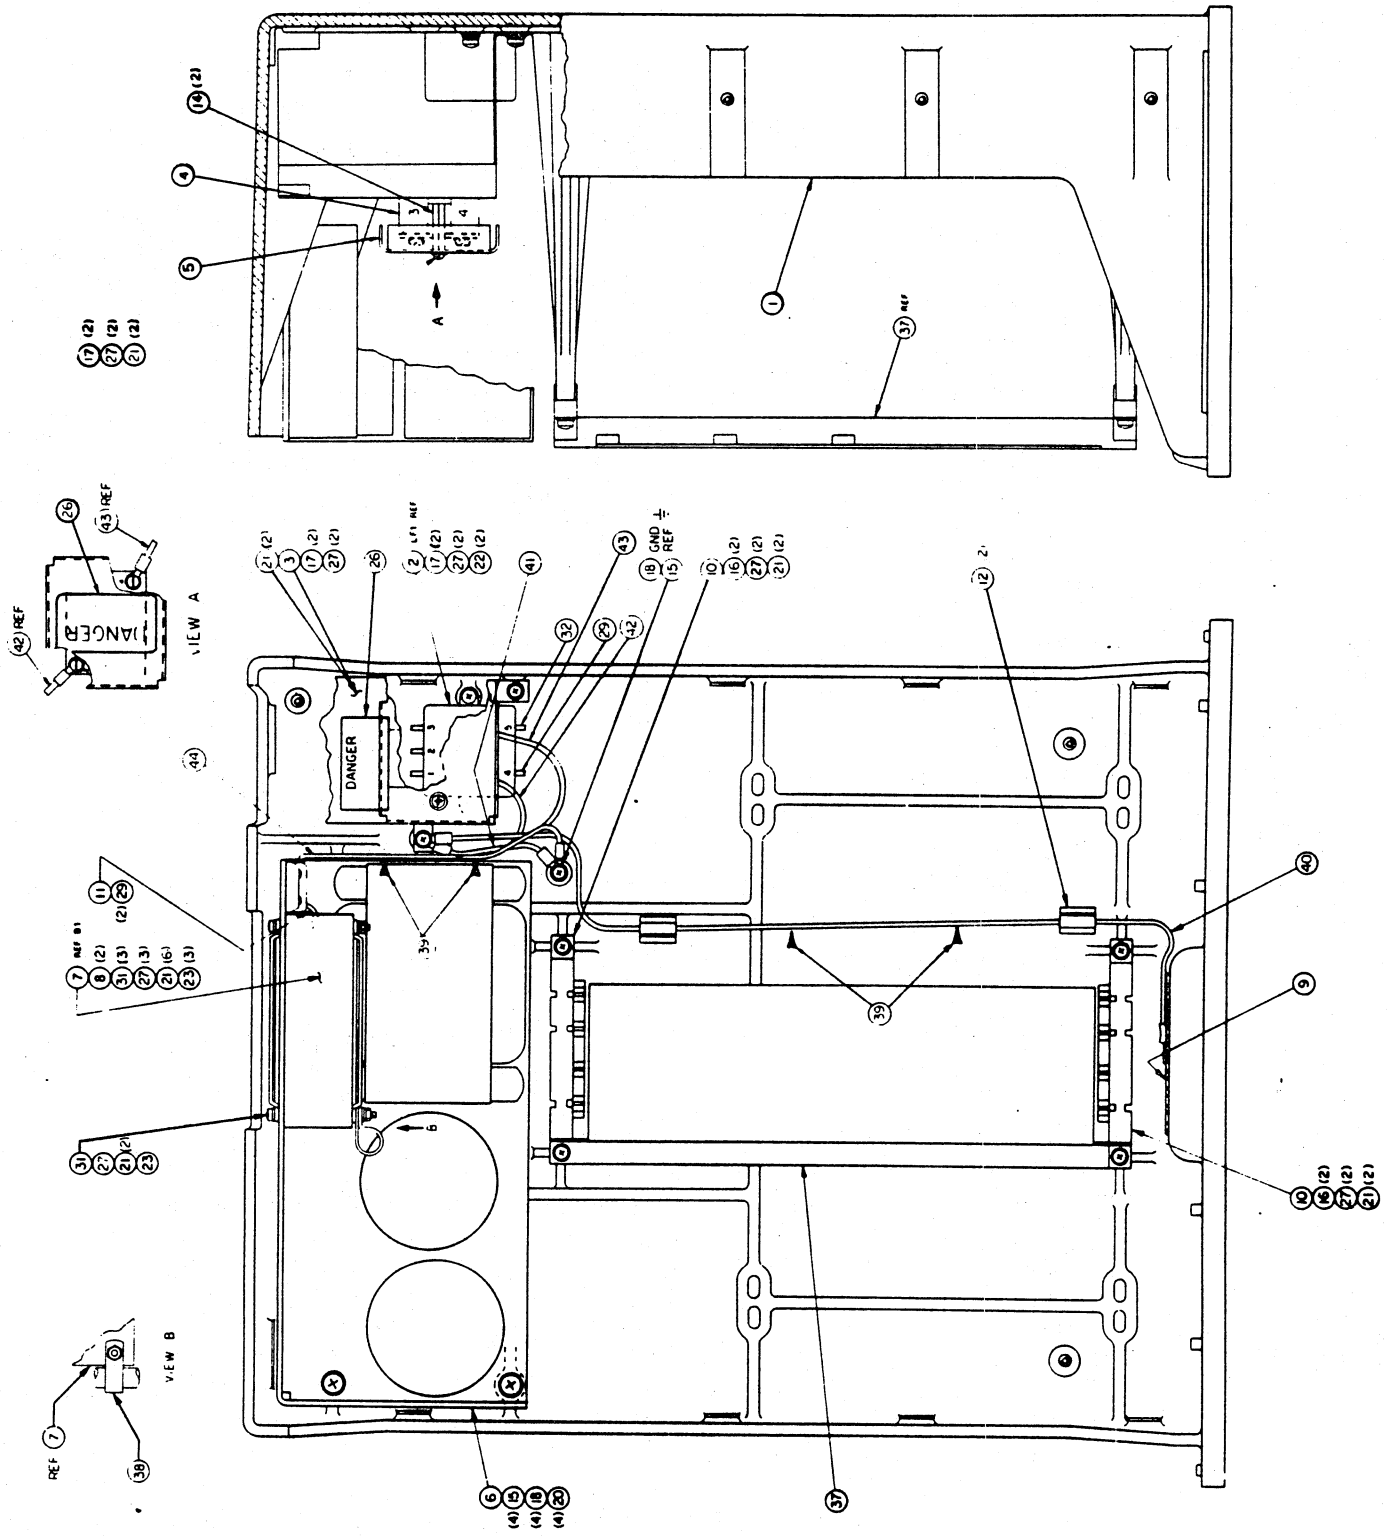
Sub-System Assembly - (Sheet 1 of 2)
